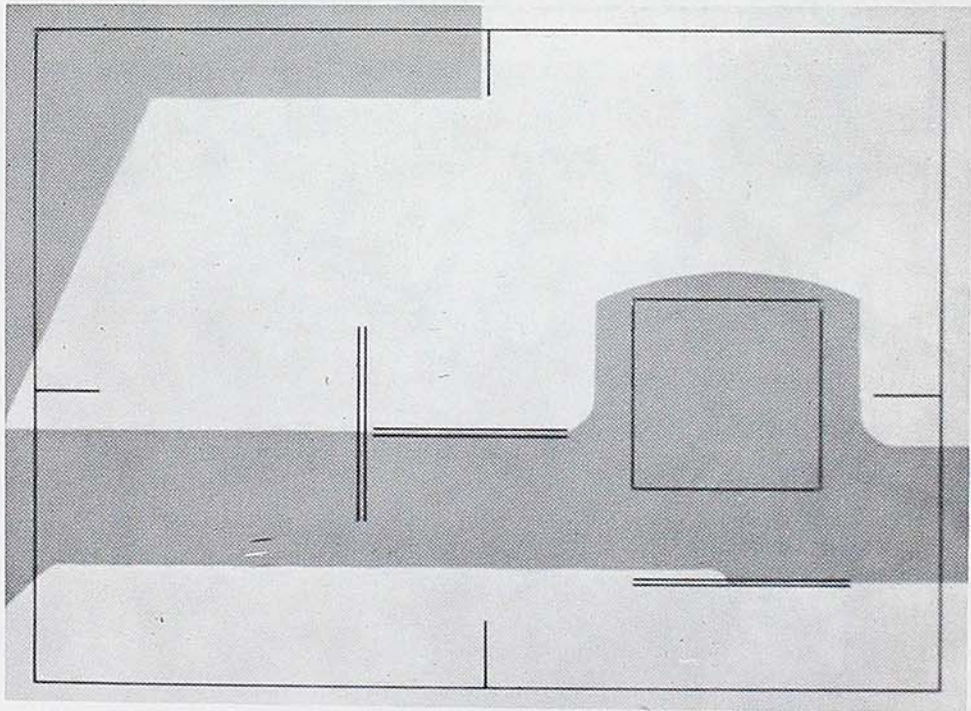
Component Setting for Checking Location of Pivot Hole from Top Surface and Location of Stop Surface from Pivot Hole.
